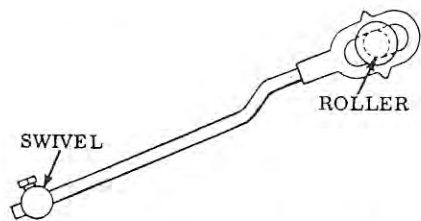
With bellcrank fully to rear, loosen swivel clamp and center the roller in throttle rod as shown. Refer to text.
